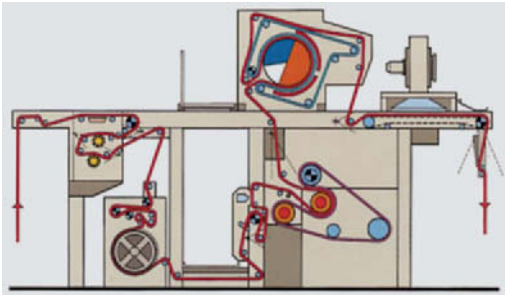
Contipress machine by Menschner with pin-wheel take-up and with chilling unit at the run-out.
